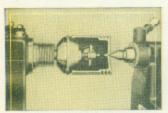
Cross Section View of a Piston Mounted on Piston Adapter.
